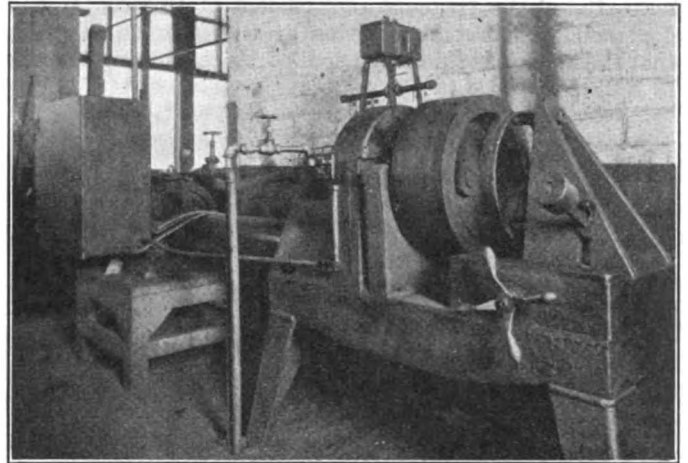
MOTOR-DRIVEN MACHINE FOR RUNNING-IN INTERNAL BRAKE-BAND ASSEMBLIES
